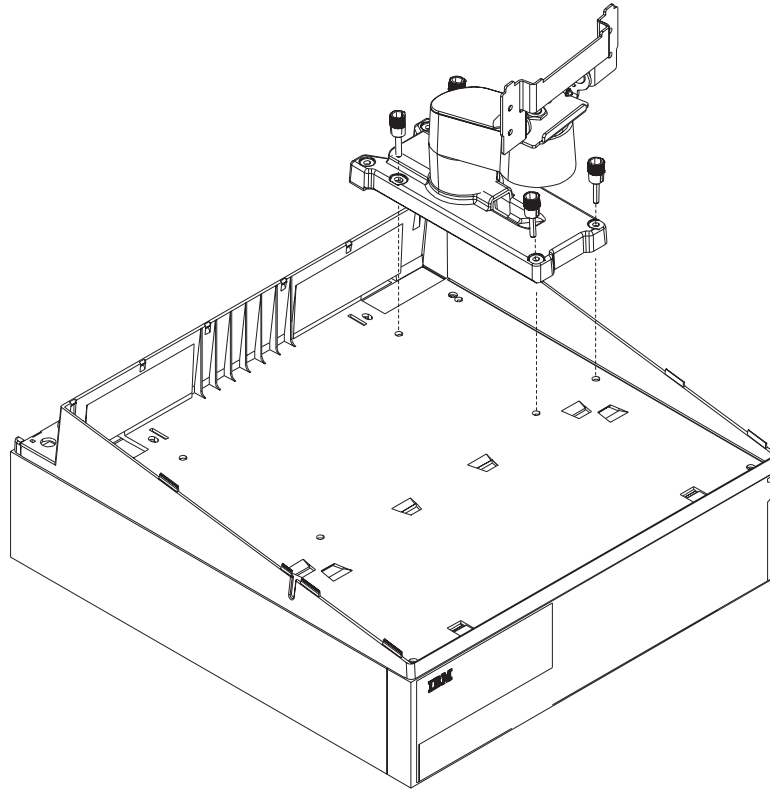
Securing the arm assembly to SurePOS 720, 740, 780
